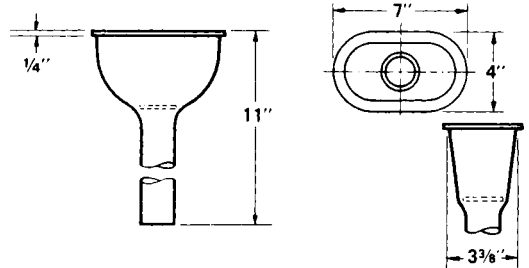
Plain End Outlet 3- by 6-in. Oval
